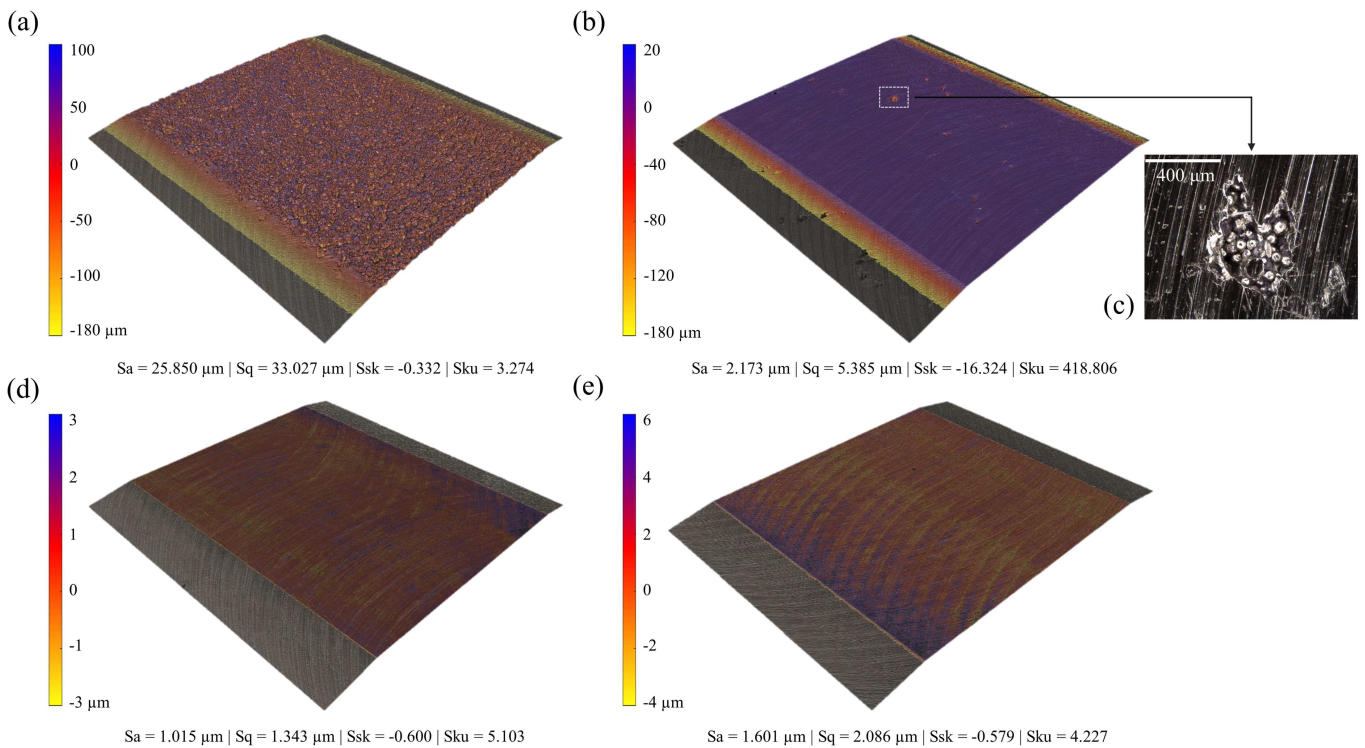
Confocal microscopy images showing the surface topography of non-HIP'ed SEBM specimen test surfaces - (a) surface in as-built condition, (b) surface machined to a depth of 1.00 mm resulting in exposed defects (c) a single LOF pore exposed during machining, (d) surface machined to a depth of 0.50 mm. (e) Shows the topography of a UD-rolled specimen machined to a depth of 0.50 mm.
